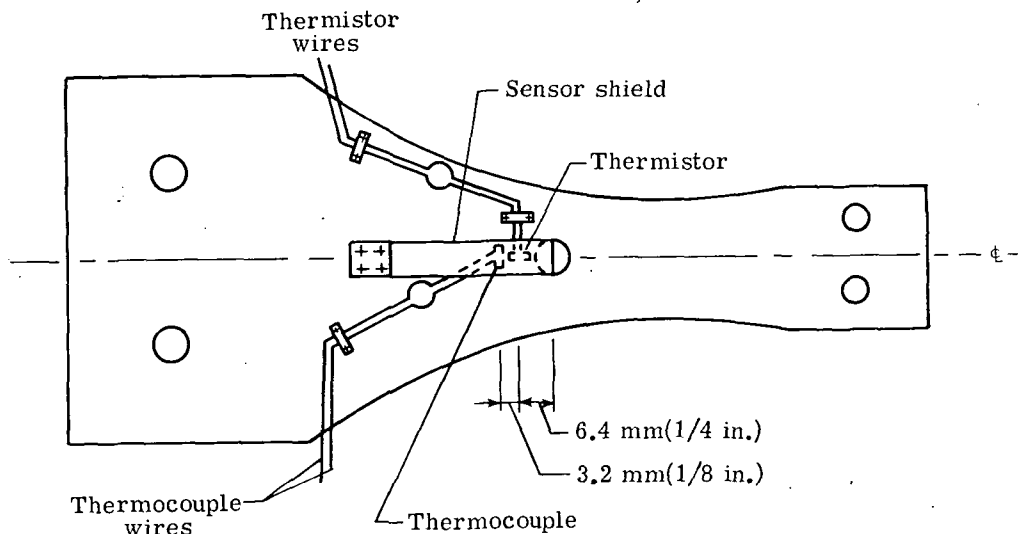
Location of thermistor, thermocouple, and sensor shield on bottom surface of specimen.
